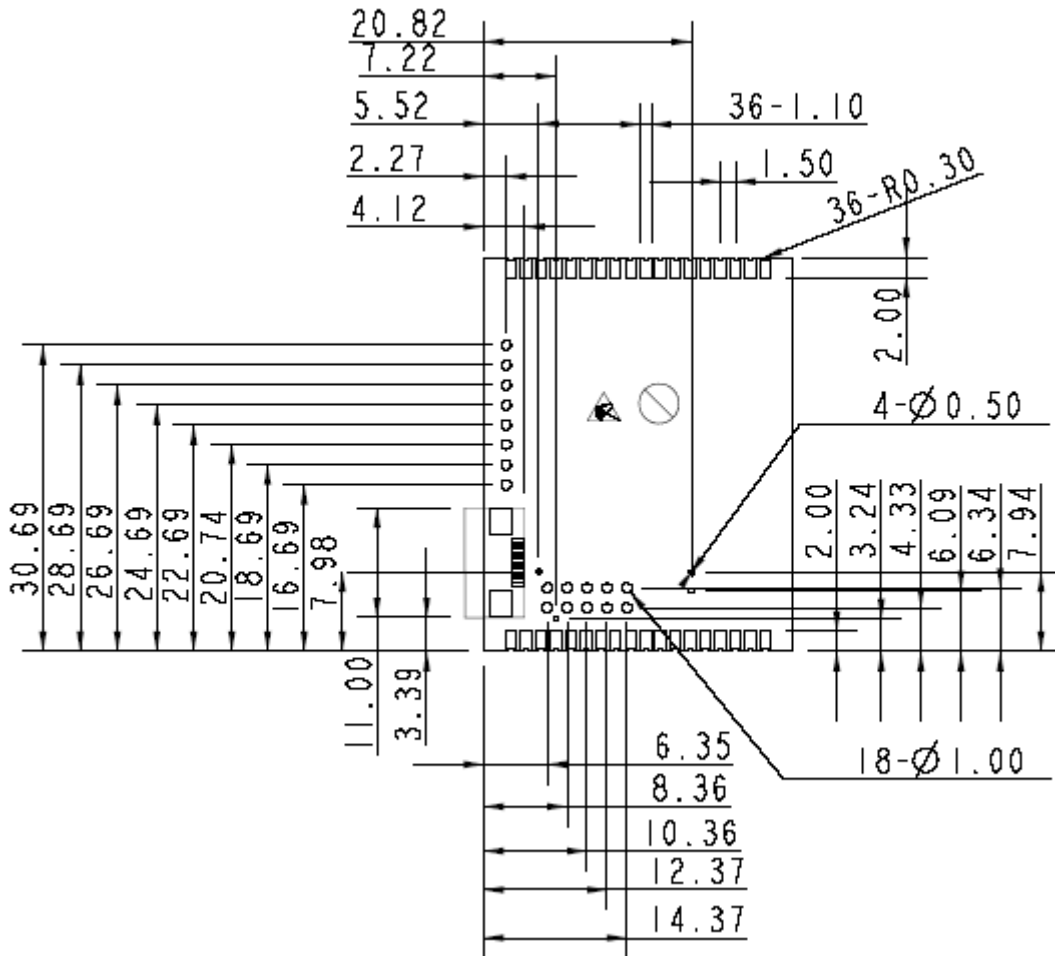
PCB encapsulation diagram of relevant female socket (bottom view)
